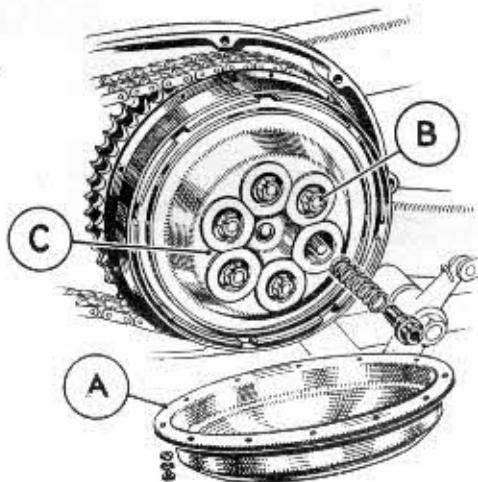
CLUTCH SPRING ADJUSTMENT
